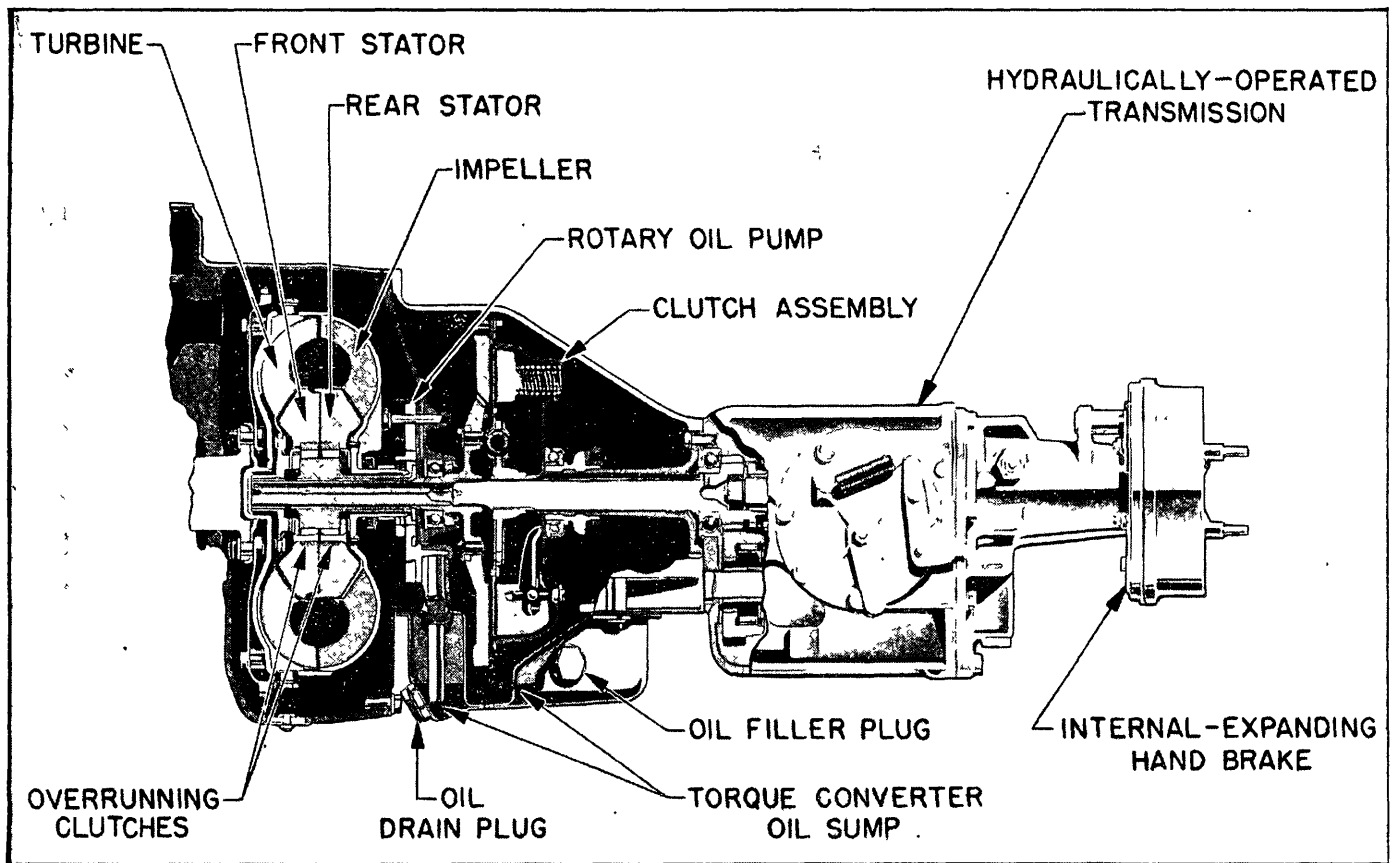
A 1951-52 Chrysler and De Soto V8. Torque converter
